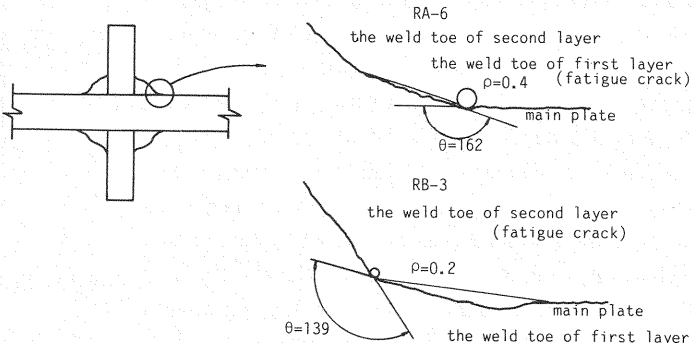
Weld Toes of Fillet Welded Joint RA and RB.
